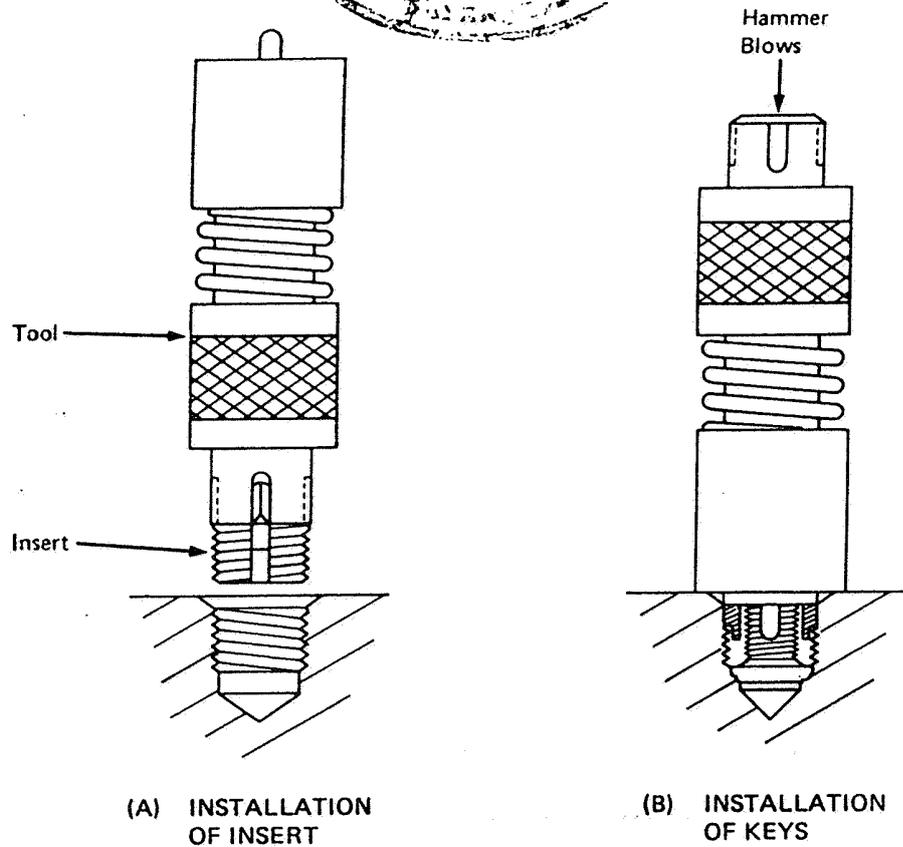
INSTALLATION TOOL (KEY-LOCKED INSERTS)
